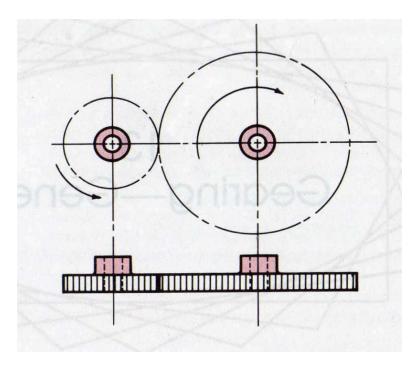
Spur gears are used to transmit rotary motion between parallel shafts.
